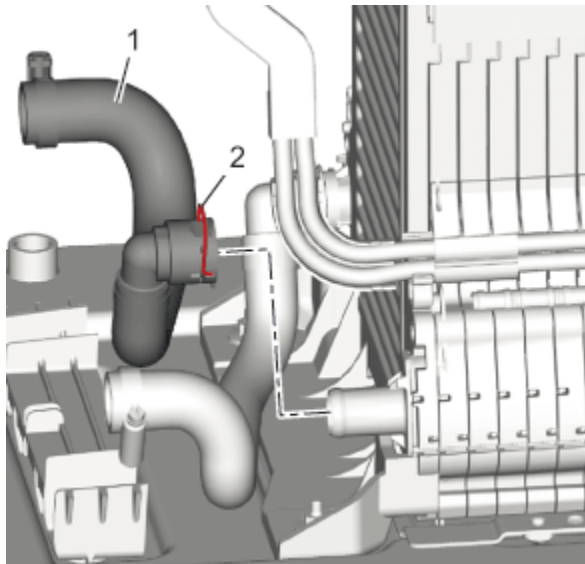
Clamp And Cell Battery Cooling Manifold Outlet Hose
